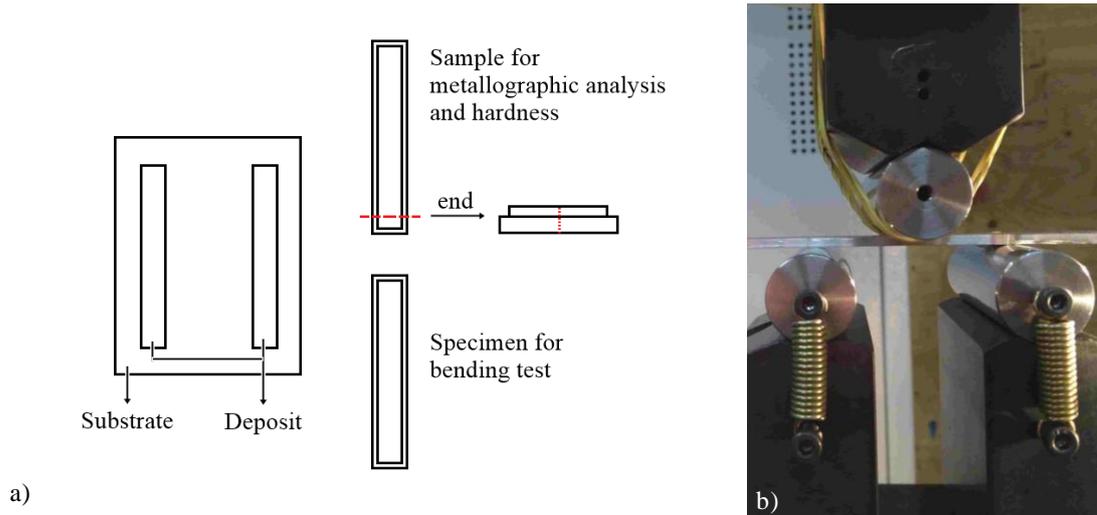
a) Sample extraction scheme for metallographic analysis, hardness and three-point bending tests. b) Three-point bending testing machine.
